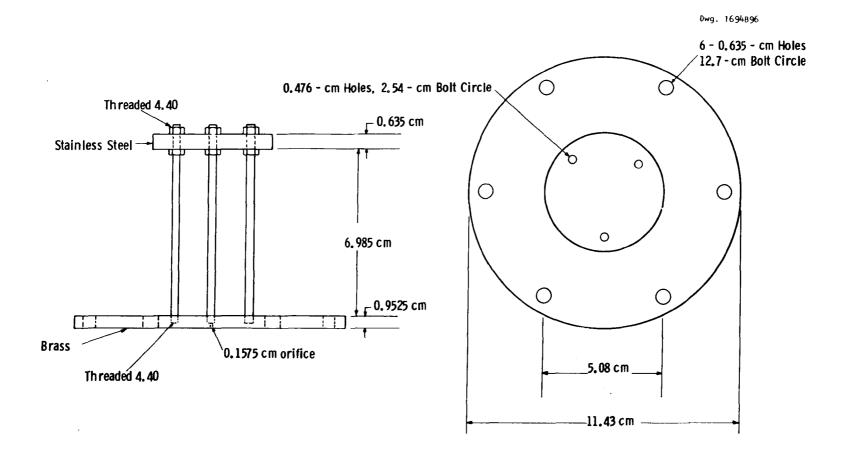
Target Assembly for 7-cm Attrition Cold Test Cell
